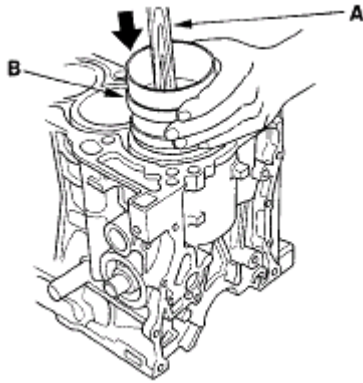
Positioning Piston/Connecting Rod Assembly In Cylinder
